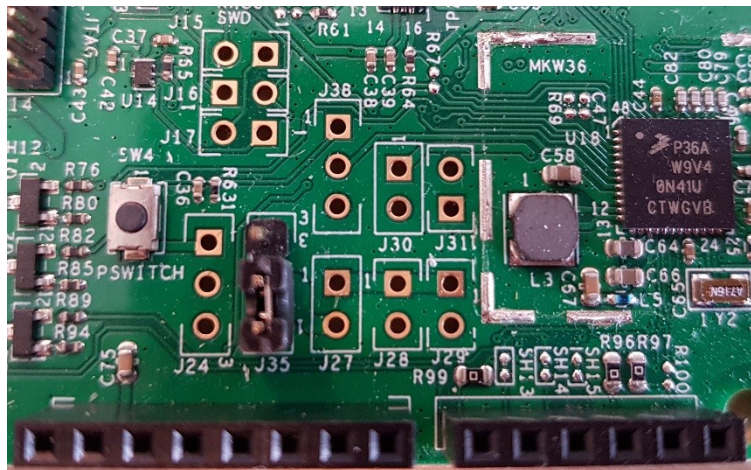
FRDM-KW36Z board, Rev. B, default jumper setup – Top view
